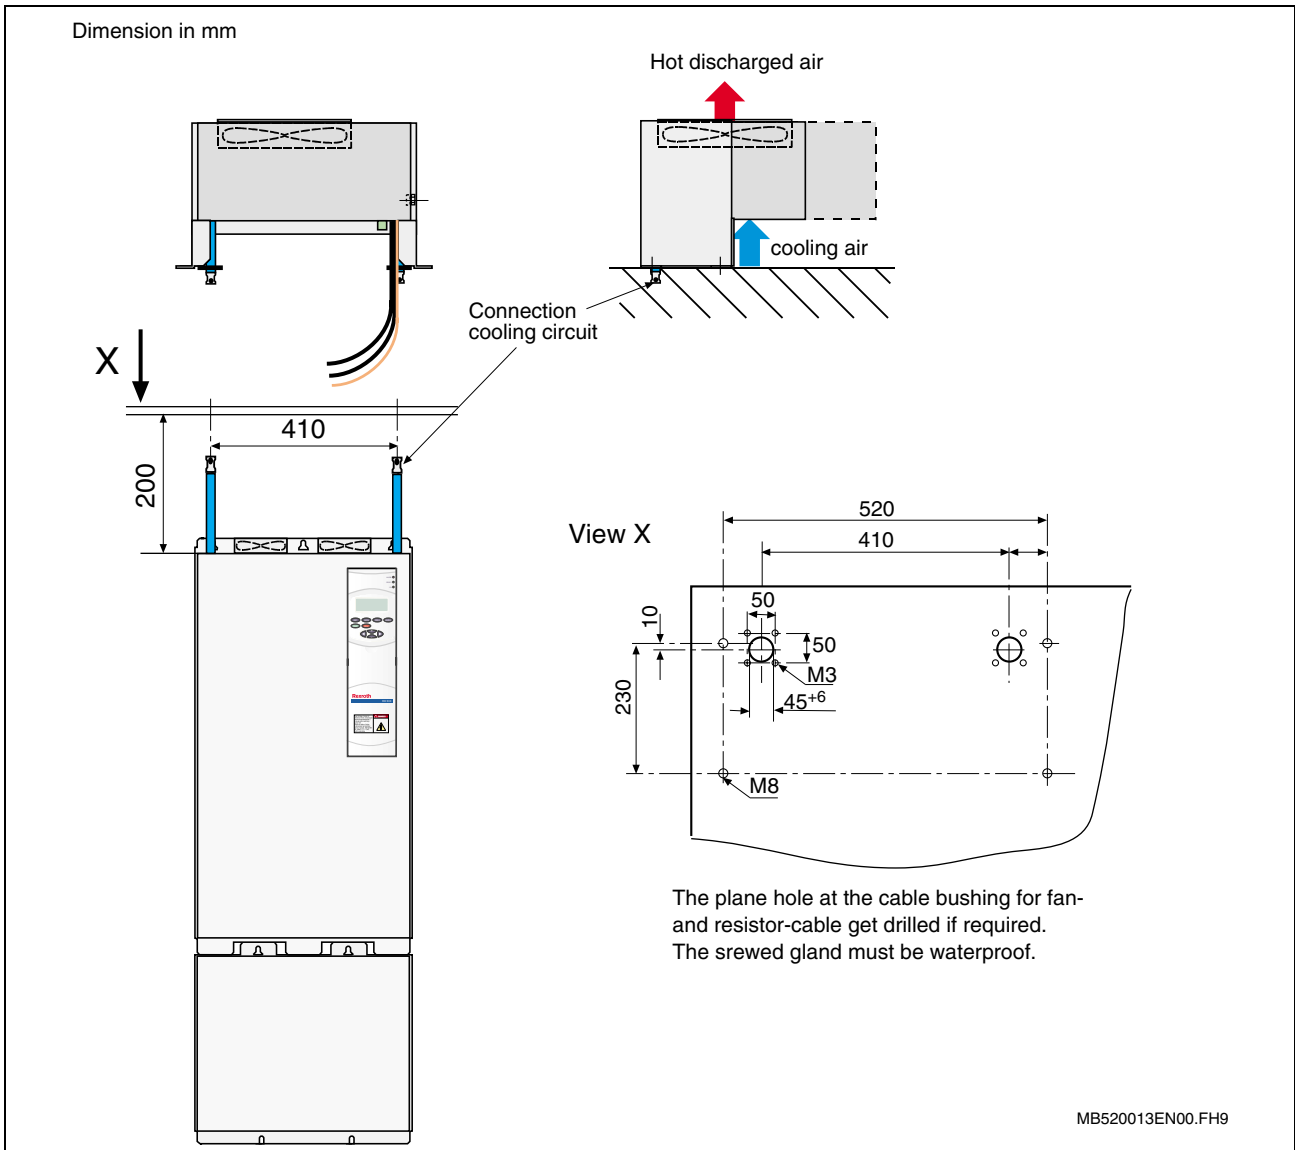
Dimension sheet for cabinet roof mounting, size class G
